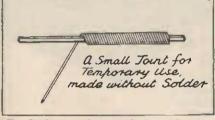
A connection of this type will often serve where a temporary joint for experimental work has to be made.
